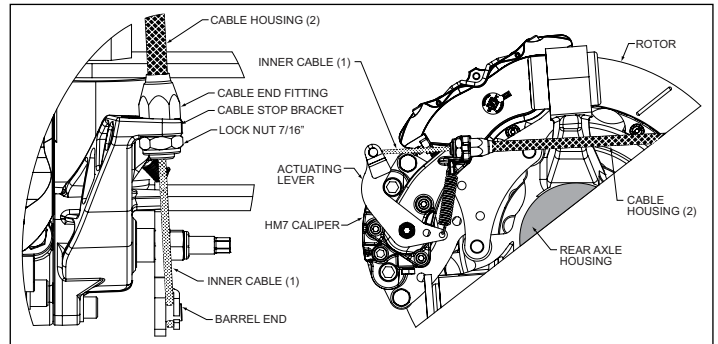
Typical Installation, HM7 Parking Brake Caliper
